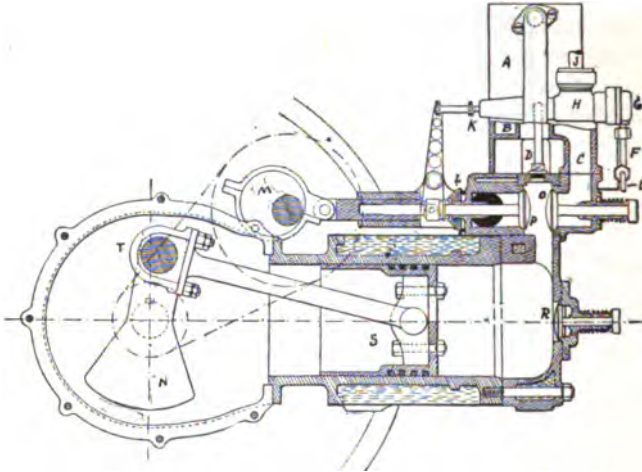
Roots' Kerosene Oil Motor for Vehicle Use. Sectional view showing the hot tube ignition, oil, vapor and air inlet and reciprocating parts. A is the vaporizing chamber surrounding the chimney of the hot tube, D. The eccentric, M, on the cam shaft actuates the exhaust valve, P, held in place by the spring, L, at the same time moving the link, K, which opens a valve contained in H, allowing a small amount of oil to be sprayed through the tubes, E, F, G, into the circulating chambers contained around the hot tube, D, as shown at B. The oil circulating around the heated space is transformed into vapor, which is fed into the channel, C, behind the inlet valve, O, which is opened by compression of its spring at the suction stroke. The valve, R, controlled by an adjustable compression spring, also admits sufficient air into the cylinder to give a mixture of the required proportion. The reciprocating parts are the piston, B, the connecting rod joined by a strap, T, to the crank pin, opposite to which is the balance weight, N. This section very well illustrates the workings of the type of explosive motor using hot tube ignition.
